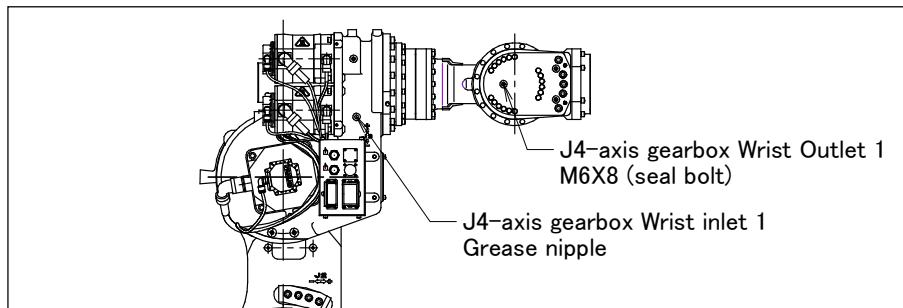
(i) Grease replacement for the J4-axis gearbox (R-2000iB/165CF)
